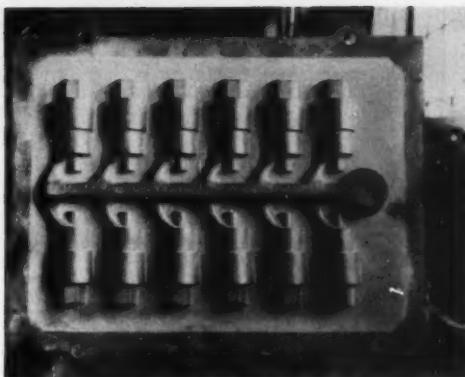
Cope side of aluminum matchplate used in casting bronze boiler plugs. Drag side is identical.
